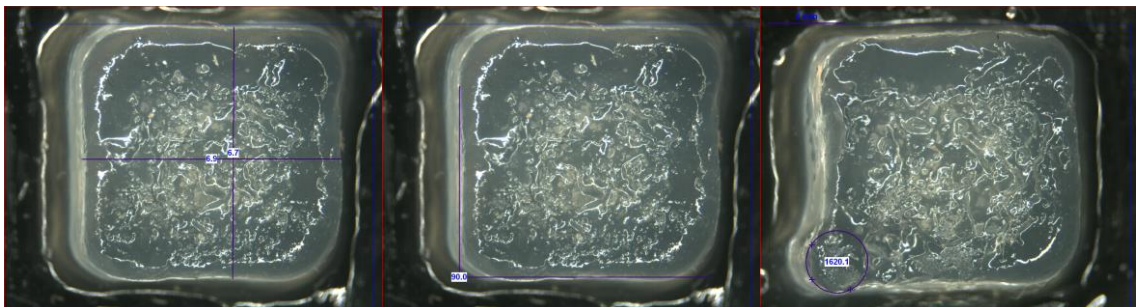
Overall dimensions; corner angle; and corner radius
